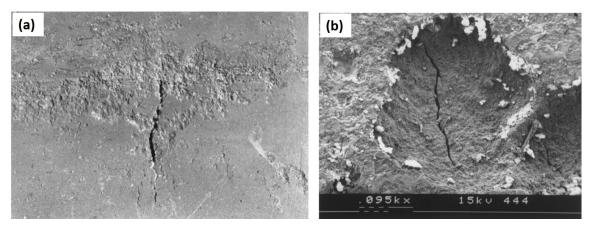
(a) Photograps of oxygen pitting (b) SEM meirograph indicating fatigue crack initiated at the bottom of pit [6]
